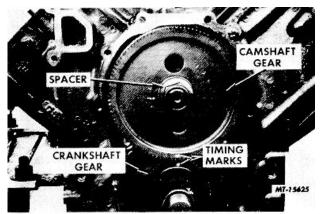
Aligning Timing Marks on Camshaft and Crankshaft Gears
